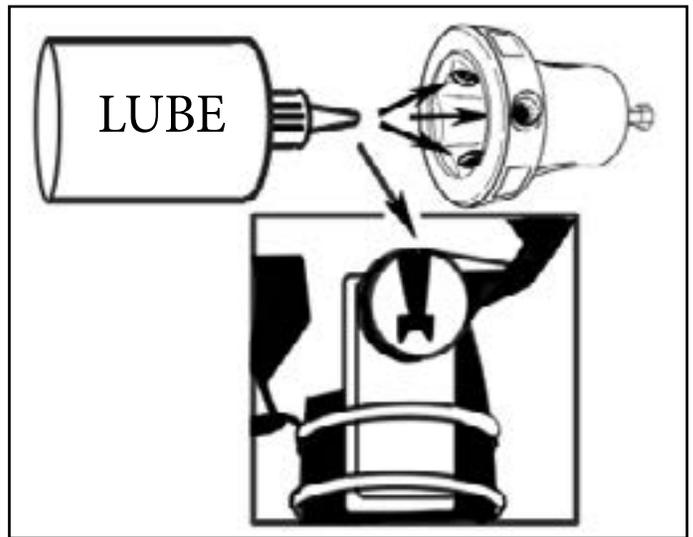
Lubricate Chuck Ball Bearings and Swivel to help prevent ice buildup.
